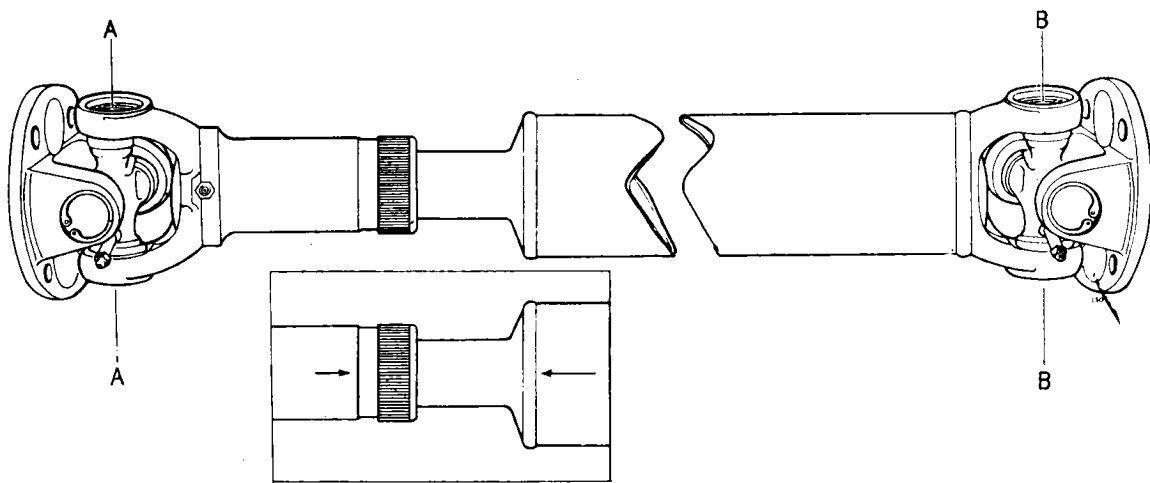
When refitting the sliding joint to the drive shaft it is ESSENTIAL the yokes A and B are in the same plane. The inset shows the arrows that are stamped on the two parts to facilitate alignment.
